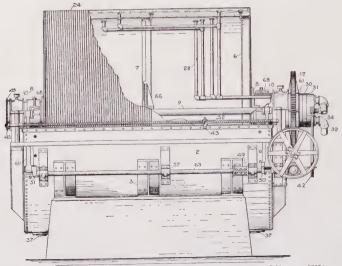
Showing the essential parts of the Oliver Filter: 1a, Closed steel drum head; 2, Steel filter tank; 3, Tank feet; 6, Drum rims; 7, Drum arms; 8, Drive trunnion; 8a, Rear trunnion; 10, Main bearing (drive end); 10a, Main bearing (rear end; 12, Worm wheel; 18a, Bevel pinion; 24, Wire winding; 28, Vacuum and air pipes; 30, Renewable valve seat; 31, Automatic valve; 32, Vacuum connections; 34, Valve stem; 42, Valve adjusting rod; 42a, Valve adjusting bracket; 43, Wiring carriage; 45, Wiring sprocket; 45a, Feed screw sprocket; 46, Wiring feed screw; 51, Agitator crank; 56, Spur gear; 56a, Ratchet spur gear; 56b, Spur gear flange; 57a, Crankshaft bearing; 61, Valve pipe plate; 62, Drum manhole; 63, Crankshaft; 66, Center spider; 69, Connecting rod; 75, Feed connection; 76, Drain connection; 78, Pinion shaft; 79, Wiring carriage guide; 83, Automatic valve nipple; 85, Agitator crank pin; 88, Stave hook bolt; 89, Ratchet lever. (Illustration by Oliver Continuous Filter Company.)
